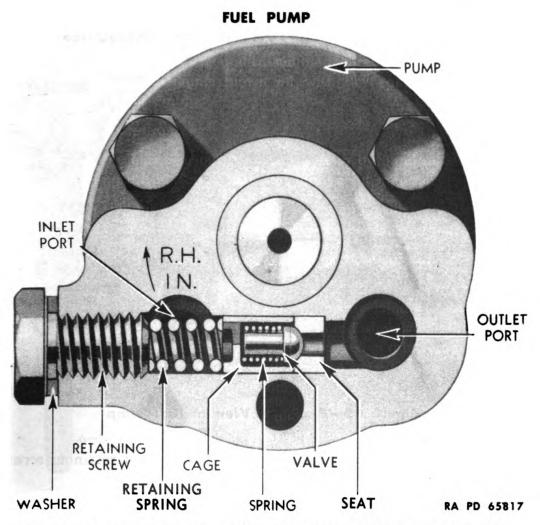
Cut-Away View of Fuel Pump Relief Valve Assembly
